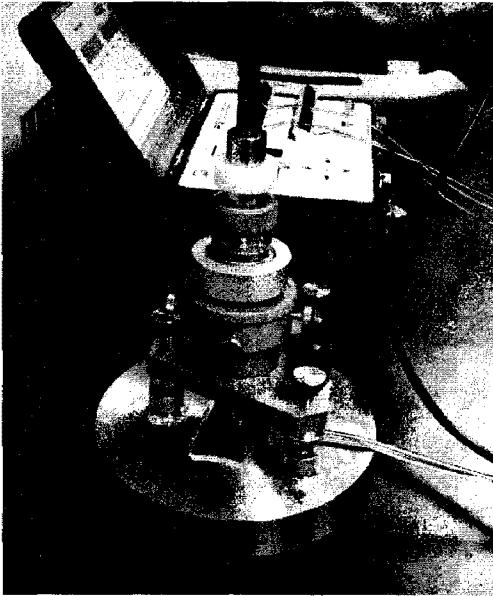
Experimental equipment for measuring residual stress using the hole drilling method
